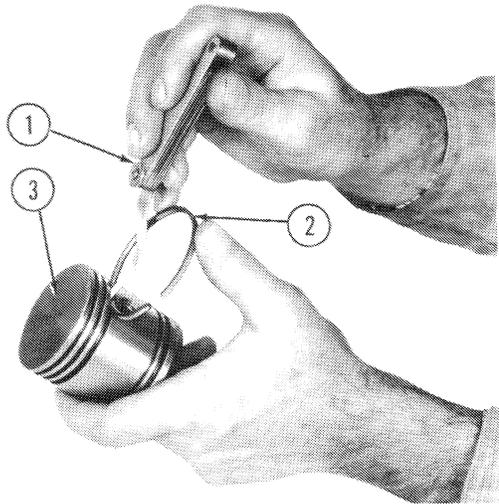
CHECKING PISTON RING TO T-28936 GROOVE CLEARANCE
